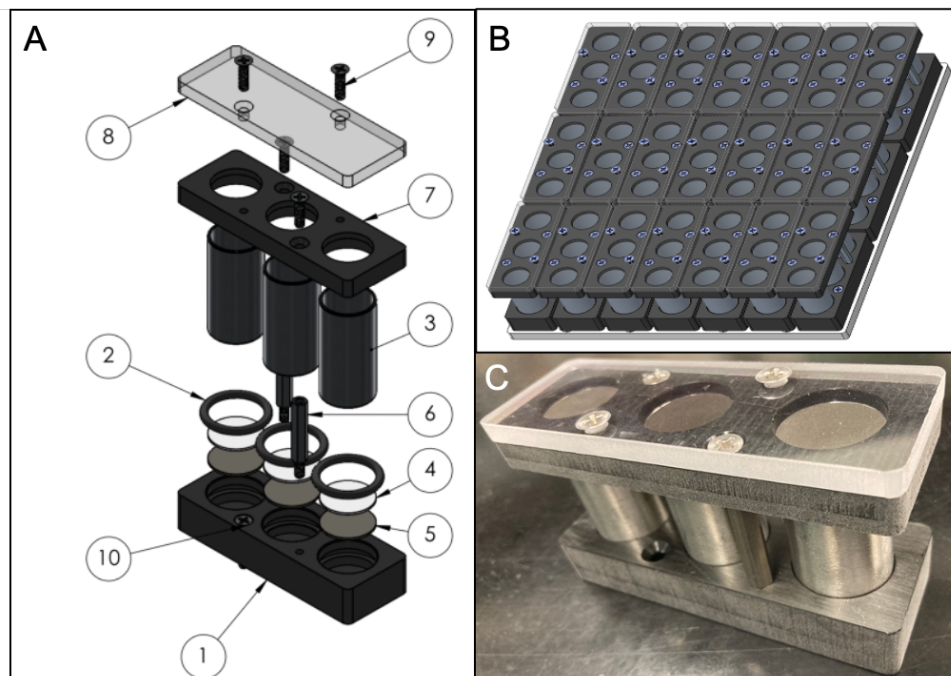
Flow cell reactor assembly. (A) an exploded diagram of the assembly with 1) the bottom piece of Delrin 2) the O-ring used to generate a water tight seal 3) the stainless steel well 4) the LDPE sample 5) a PEEK disk to ensure no reaction between the Delrin and the LDPE at higher temperatures 6) the standoff used for the clamping mechanism 7) the top piece of Delrin also used in the clamping mechanism 8) the piece of acrylic used the seal the reactor 9) the screw to affix the acrylic lid and 10) the screw to affix the whole sample holder the intermediate Delrin plate (B) how the setup sits on a shaker table (C) An image of the final product after it had been manufactured by the University of Minnesota College of Science and Engineering Machine Shop.
